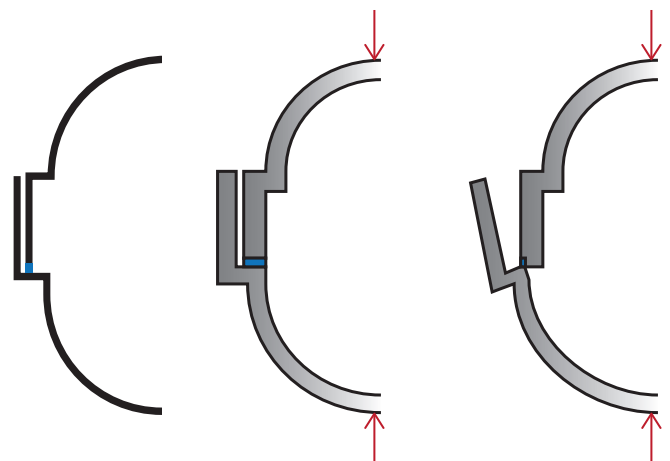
Top view of a section of the drum. Red arrow: inward forces. Blue: Contact surface of the two halves. (Left to right: single wall design, double wall design, double wall design extreme position)
